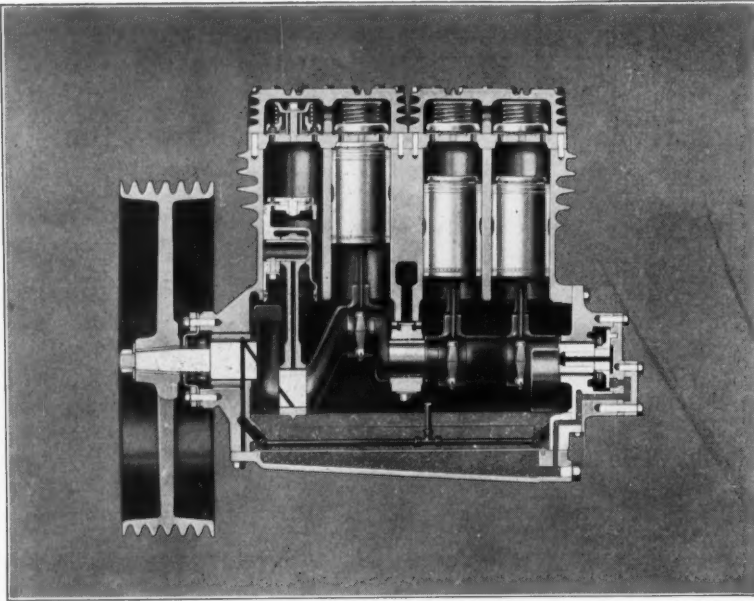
Showing cutaway view of the Frigidaire 4-cylinder air conditioning compressor. All parts of this machine are designed with very accurate precision and lubrication is entirely automatic.
